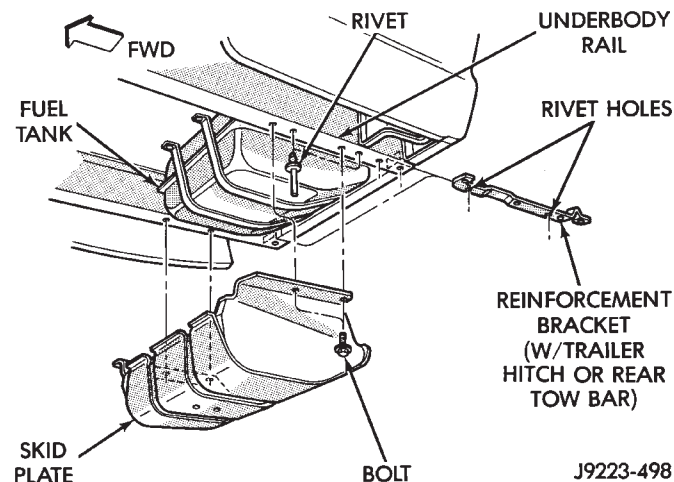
Fuel Tank Skid Plate With Trailer Hitch Or Tow Hook
